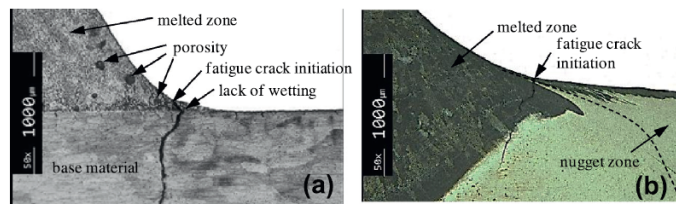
Crack initiation sites: (a) MIG weld toe and (b) Post-processed notch root using tool B.
